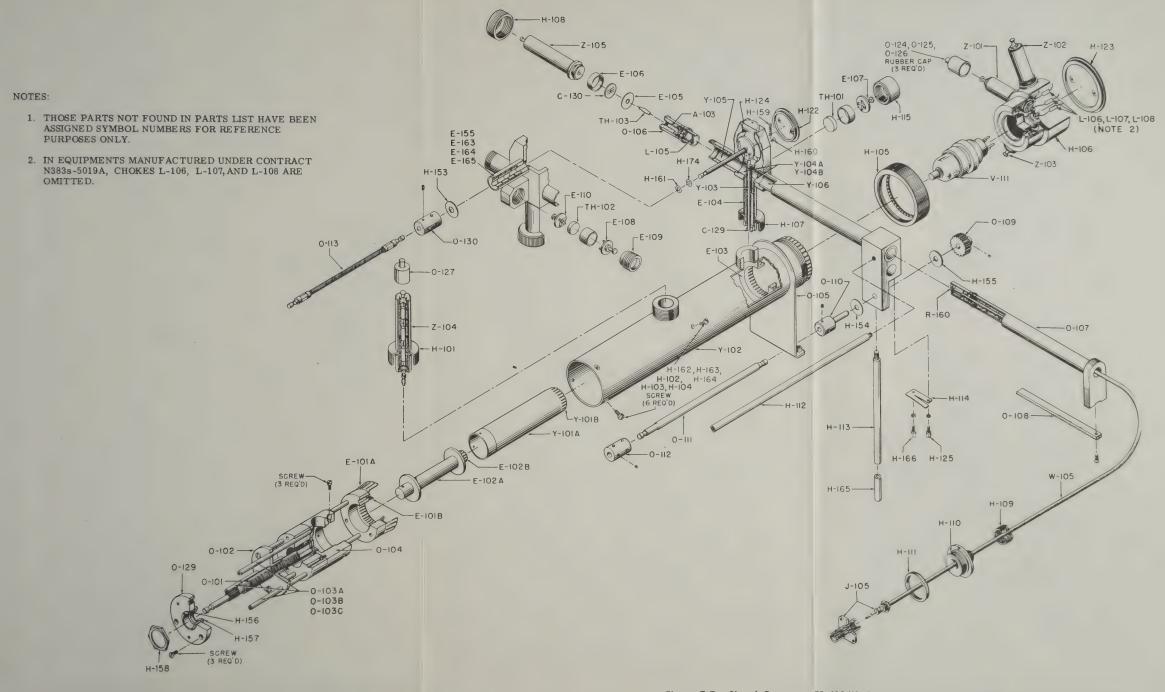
Signal Generator TS-419/U, R-F Oscillator, Power Monitor, and Output Attenuator, Exploded View
